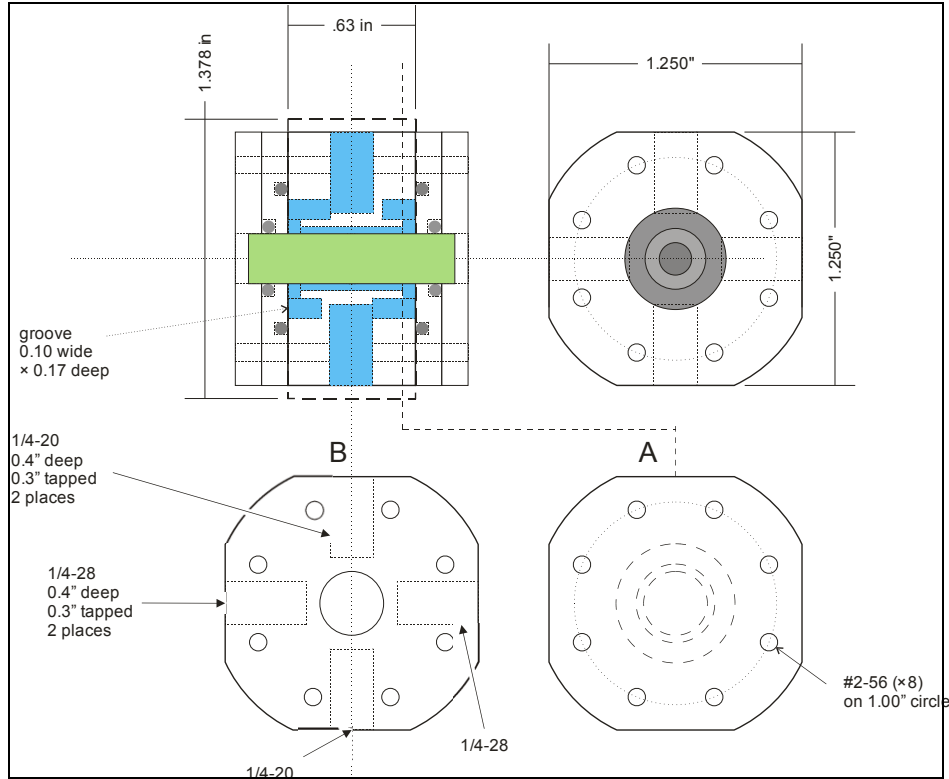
Drawing of laser head designed to accommodate rods of diameter 3–6 mm.
